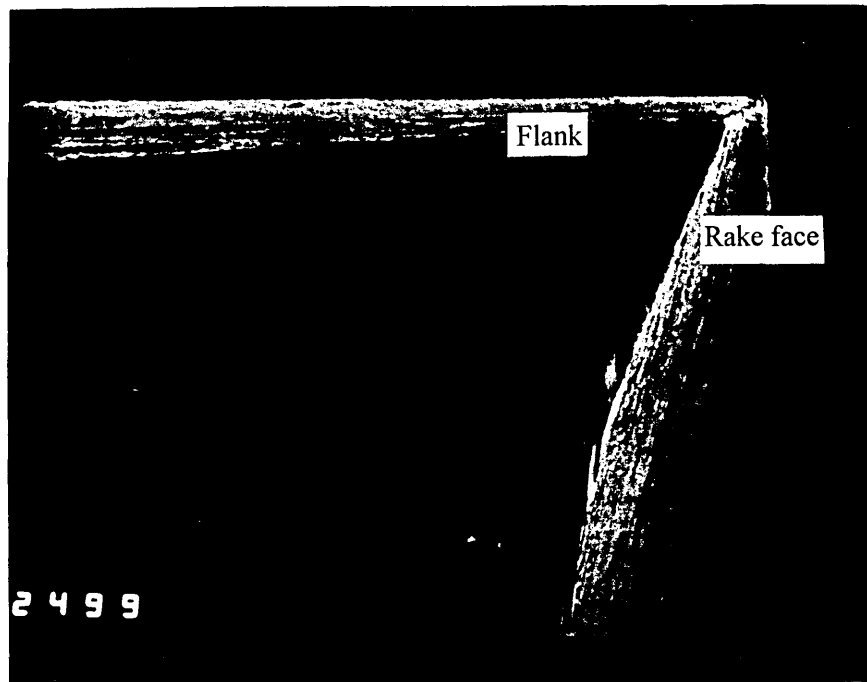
(b) Flank wear produced on the cutting edge of the roughing tooth of the TiN coated A1 segment when cutting mild steel
